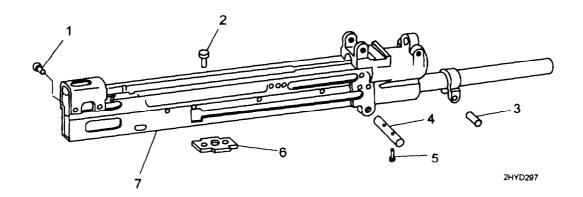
Group 15 Gun Receiver Assembly (MS0 only), PN 11686308
